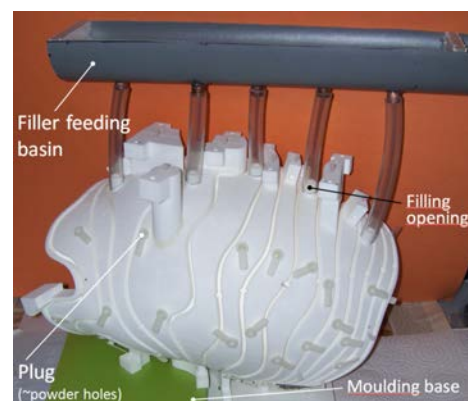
3D printed coil frame prepared for casting with resin.
